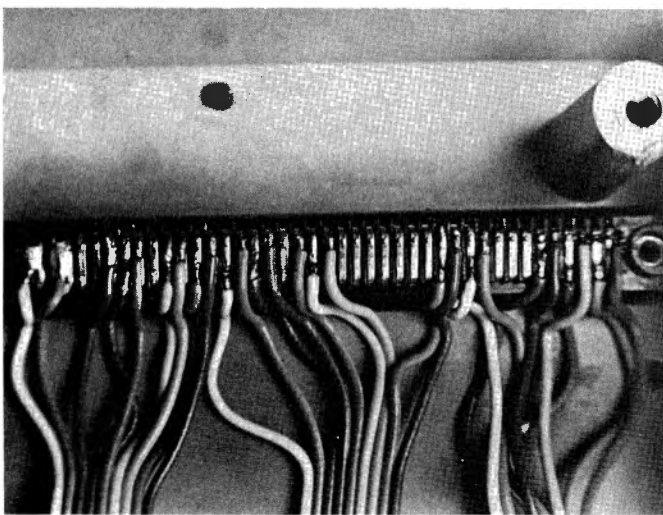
Wired 42 pin connector. Note the alternating solder points.
